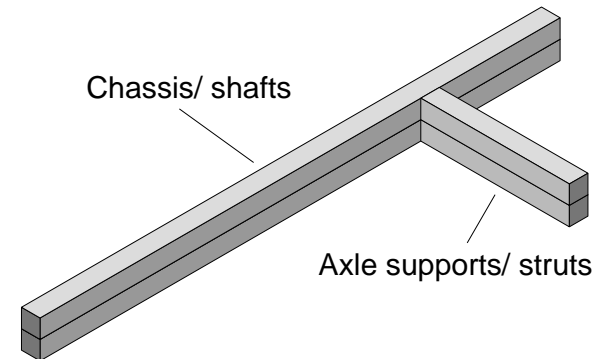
welding animal shaft and axle support strut assemblies.
